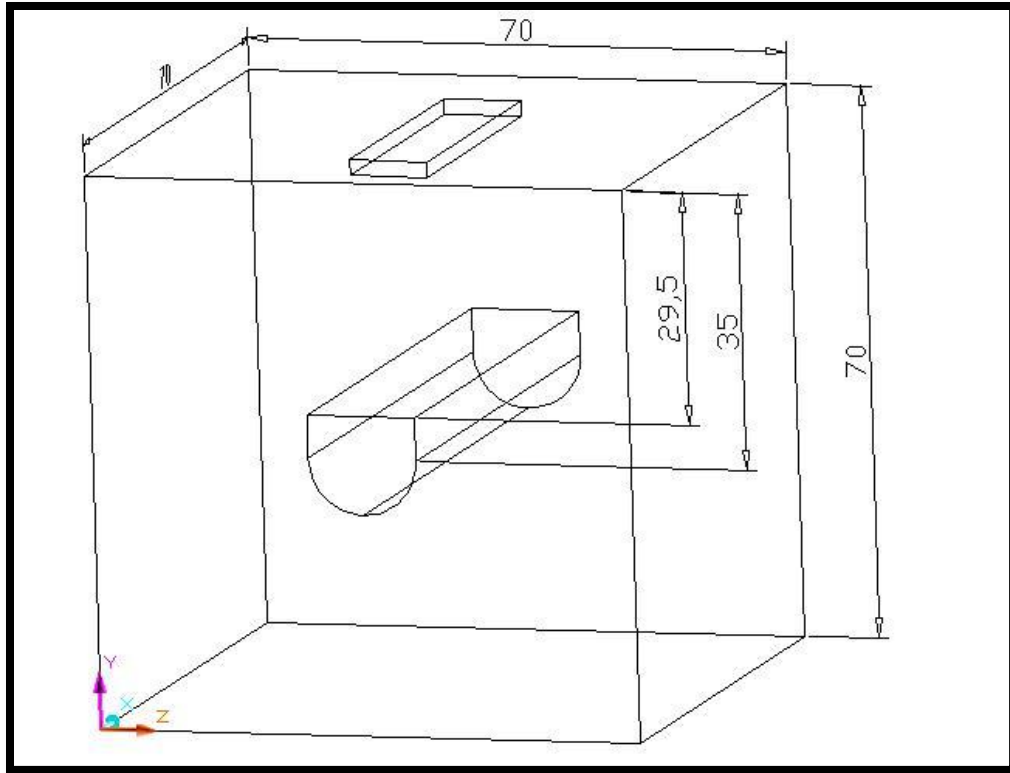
3D view for Dimension of 'D' shape cross-sectional cooling channels
